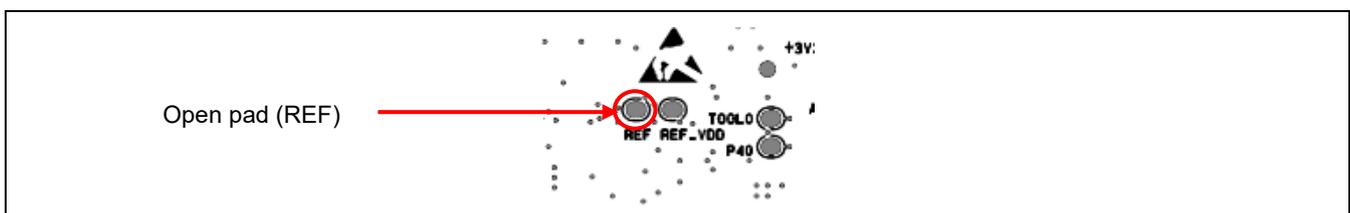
Position of the Open Pad (REF) (Soldered Side)
